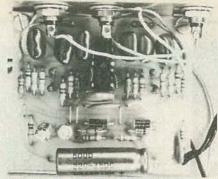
THIS IS HOW the PC board should look when all components are in place on the board.
